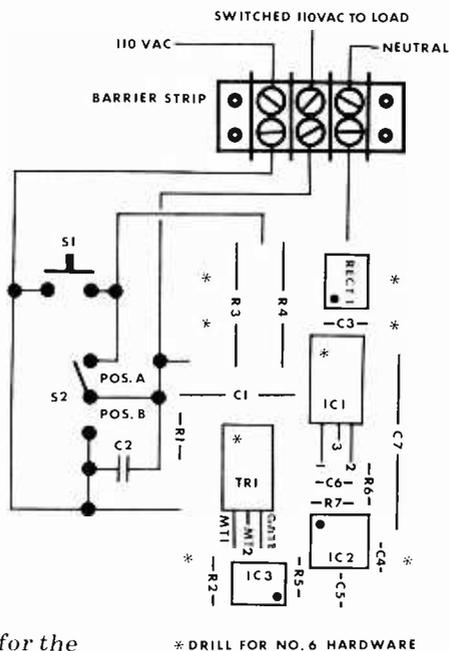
Parts placement guide for the printed circuit board is shown at right.
